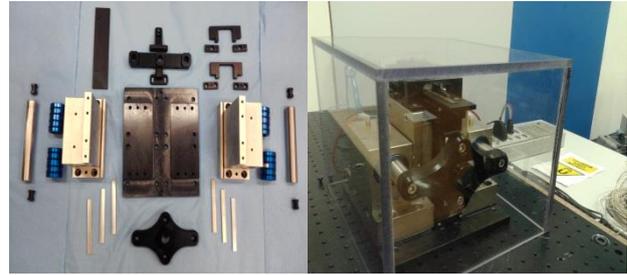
Prototype of FTS for large displacement, parts and assembly.
